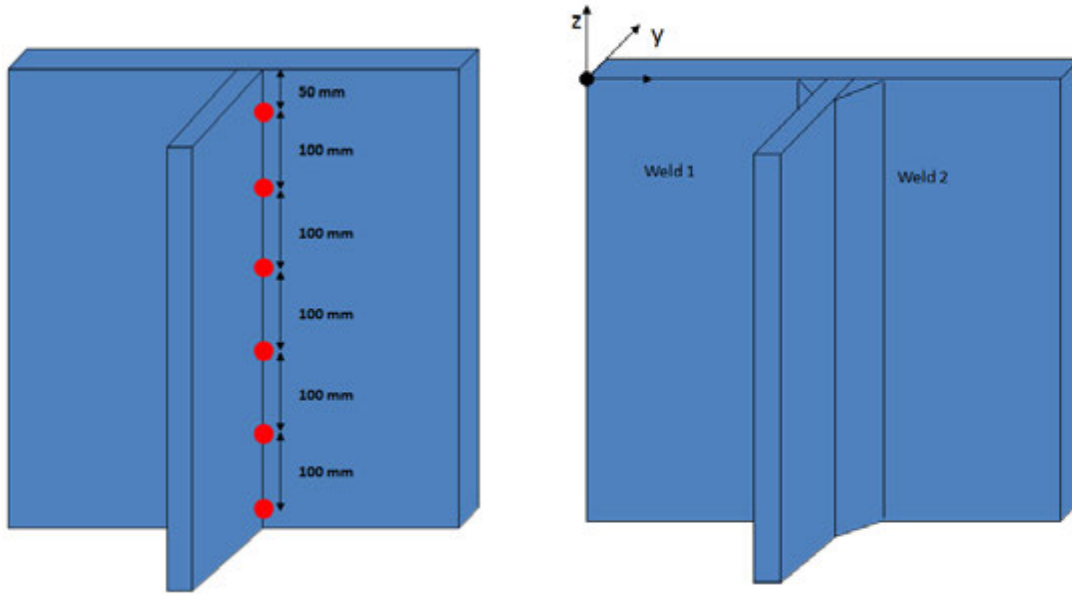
Schematic of the welded sample. A) initial tack welding. B) final structure.
